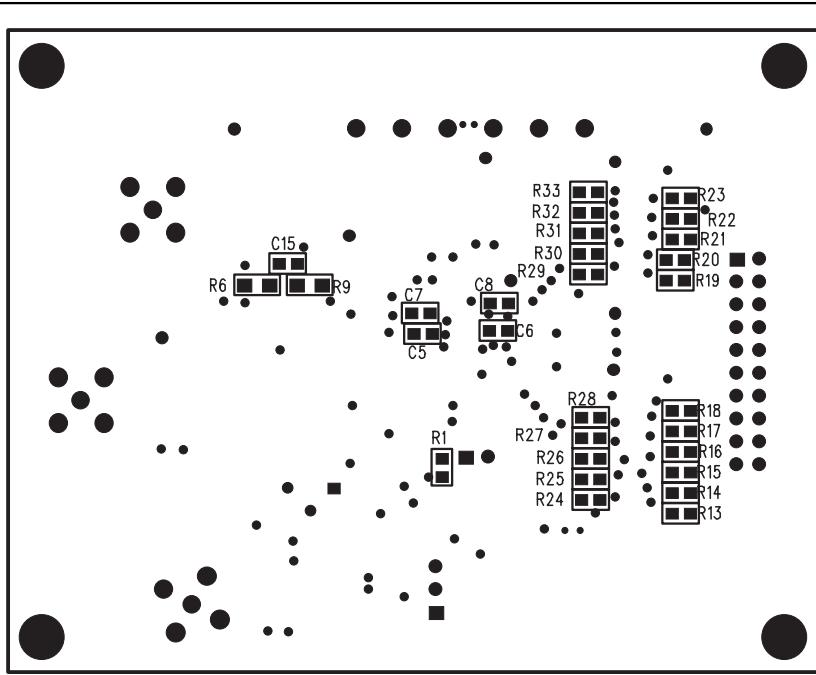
MAX1425 EV Kit Component Placement Guide—Reverse Side
